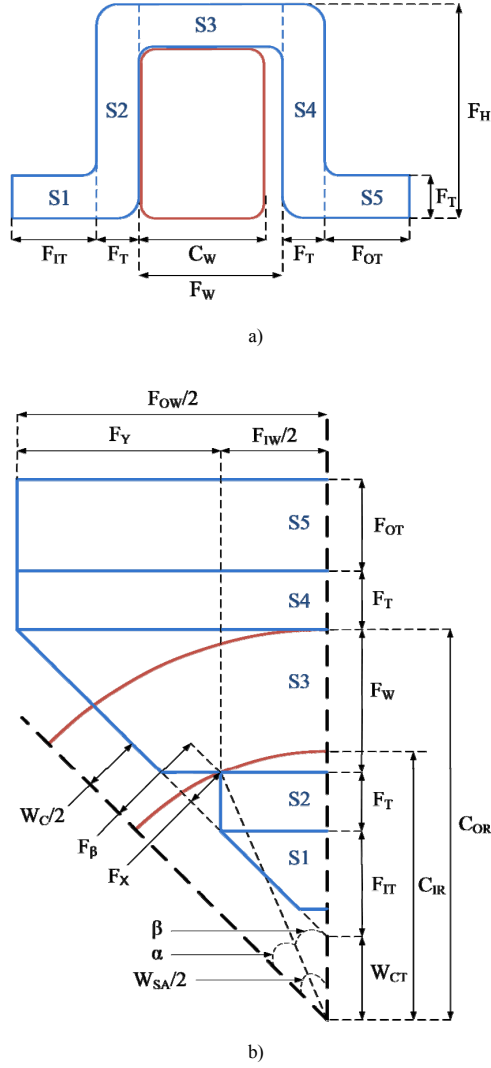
a) Cross sectional view of assembly. b) Top view of a halve winding space.
